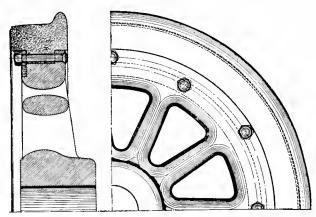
Paige Spoke Coach Wheel. Cast Iron Spoke Center with Tire Secured by Shrinkage, Retaining Rings and Bolts.
